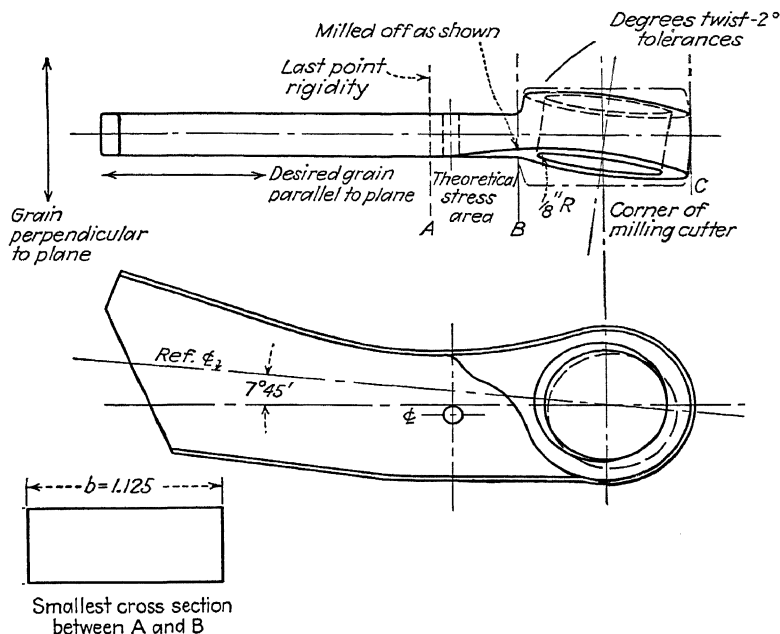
Flap-hinge fitting (14ST aluminum-alloy forging).
